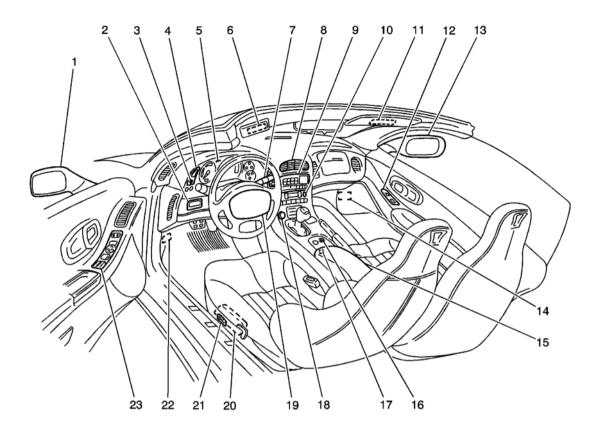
Cockpit Component View Courtesy of GENERAL MOTORS CORP.
